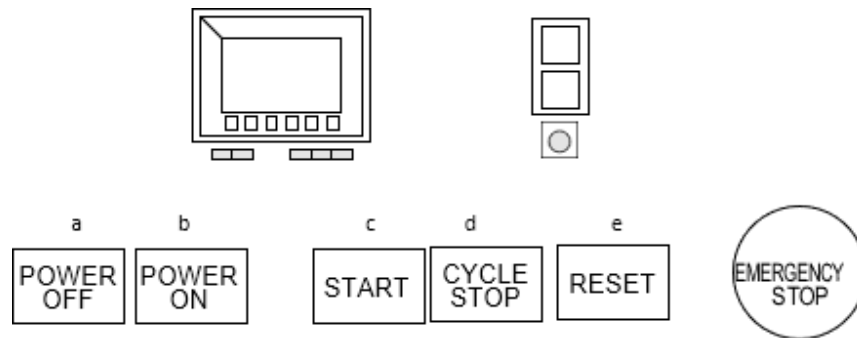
Buttons on the front panel of a pick and place machine
